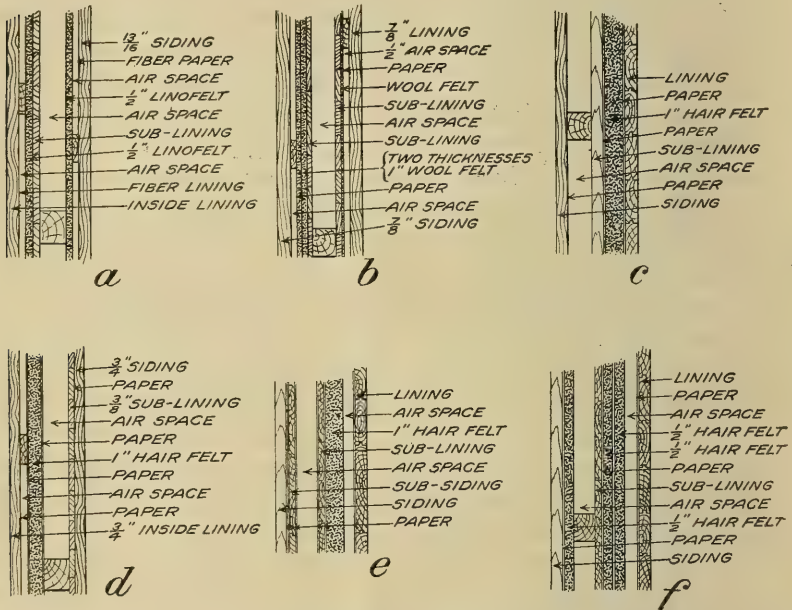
Cross sections showing wall construction of different types of refrigerator cars. *a*, Type A; *b*, type B; *c*, type C; *d*, type D; *e*, wall having a 1-inch layer of hair felt; *f*, wall having three half-inch layers of hair felt.
